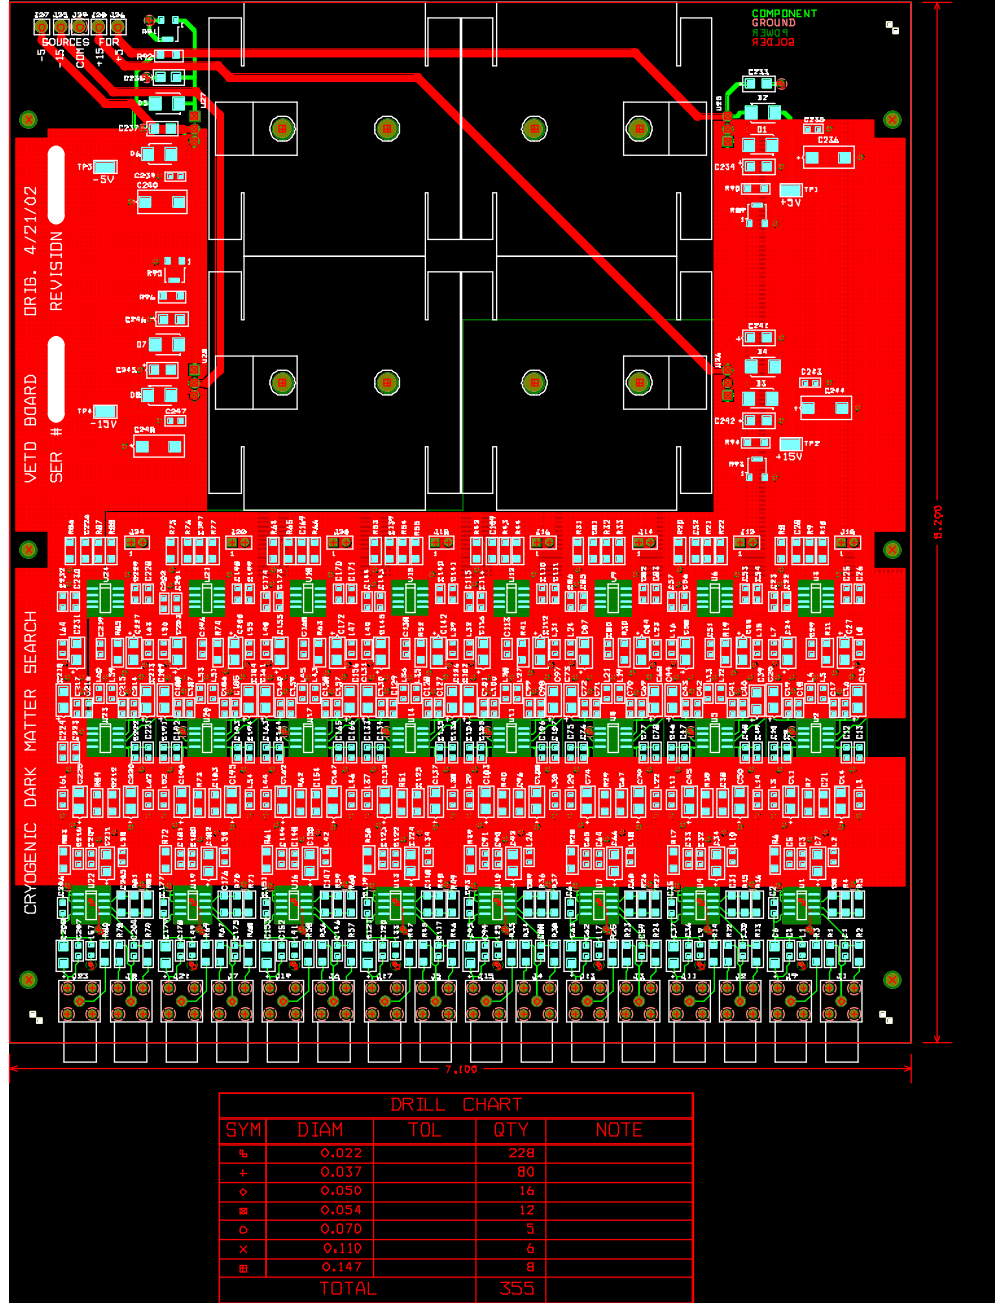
All-layer PCB layout for the deep-site vFEB.
